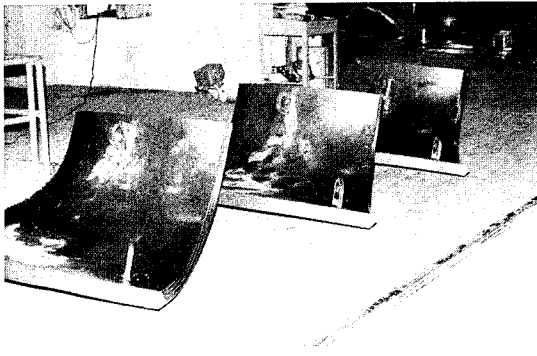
Formed Band Segments With Machined Weld Geometry
